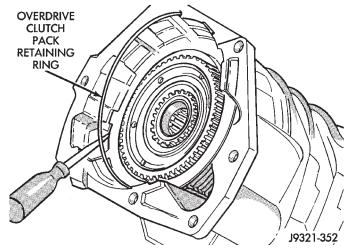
Overdrive Clutch Pack Retaining Ring Installation
